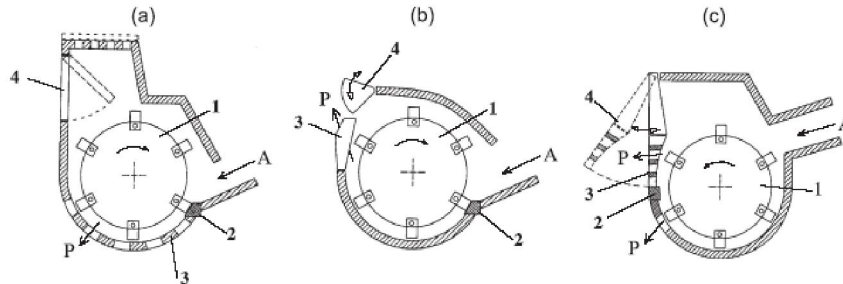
Shredder with rotating hammers for comminution (crushing) old cars (1. rotor with rotating hammers for crushing old cars; 2. metal anvil, for accepting material; 3. discharging openings for crushed waste; 4. feed (inlet); 5. production of crushing)
